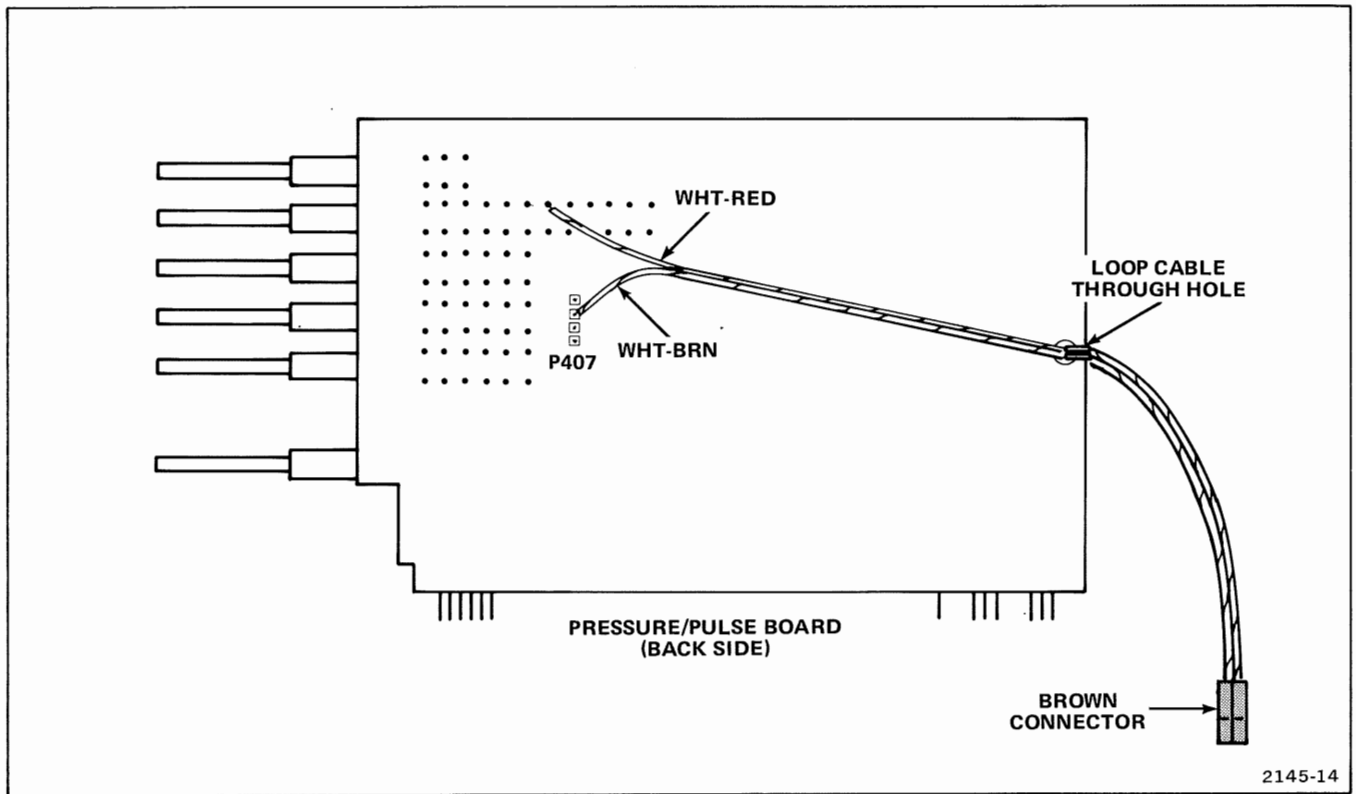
Installing 2-wire cable to 414 Pressure/Pulse Board.
